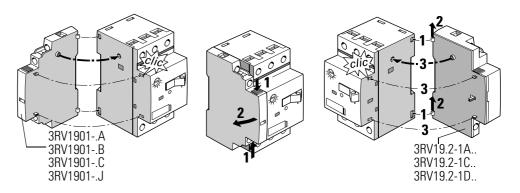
Mounting/removing the side mount auxiliary contacts/undervoltage release (example: frame size S00)
